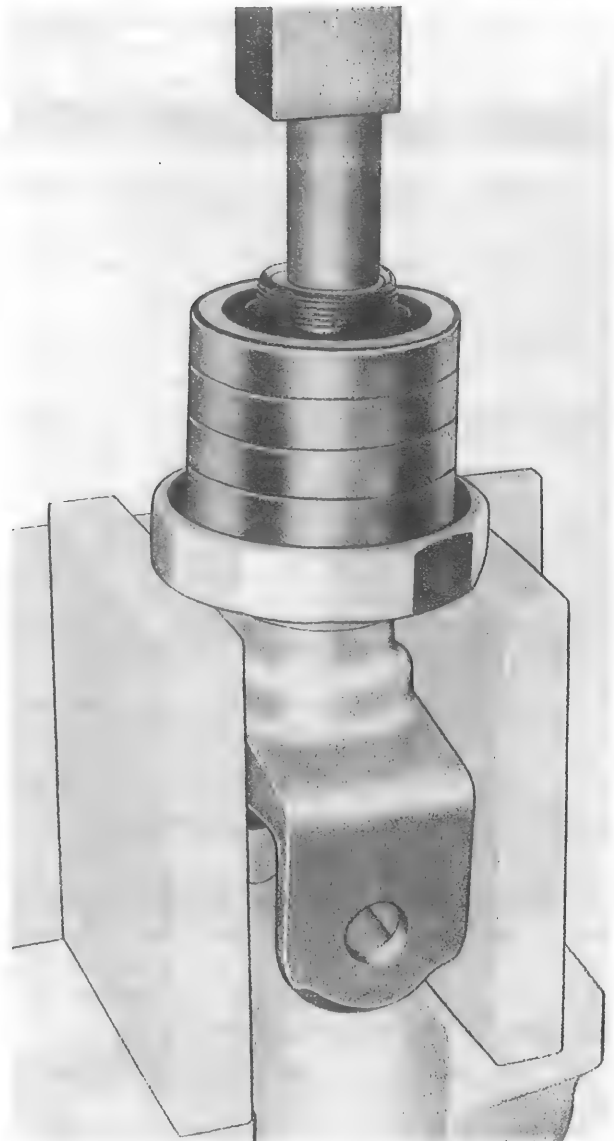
Pressing Stack Bearing Assembly from Spindle
